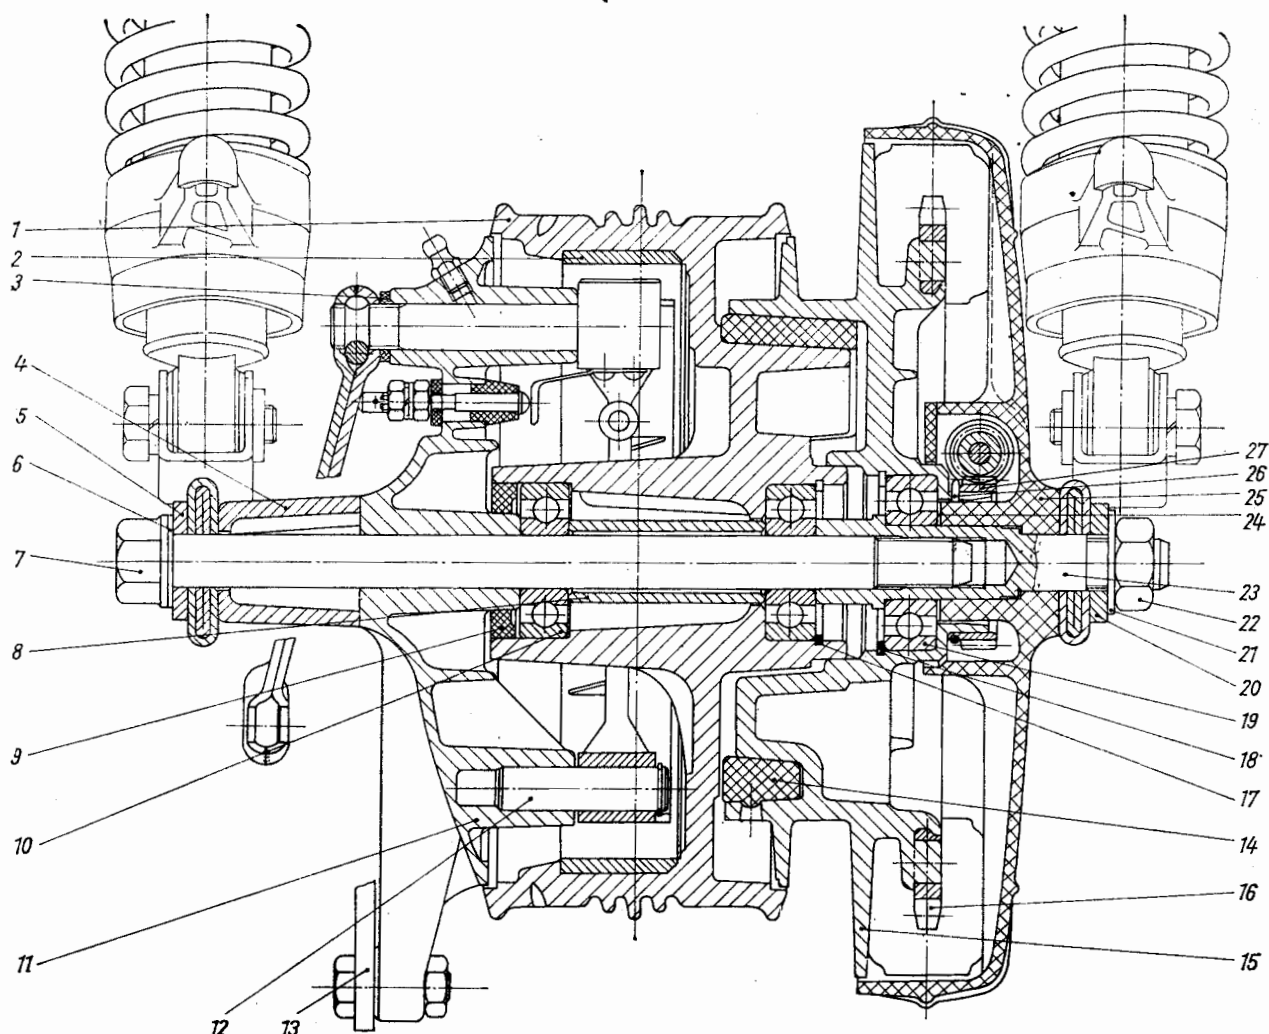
Rear wheel bearing, drive and brake (sectional view)
